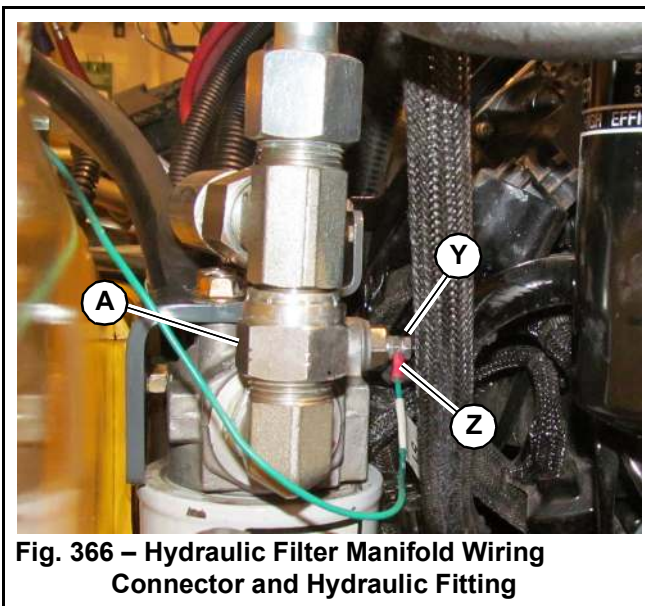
Hydraulic Filter Manifold Wiring Connector and Hydraulic Fitting
